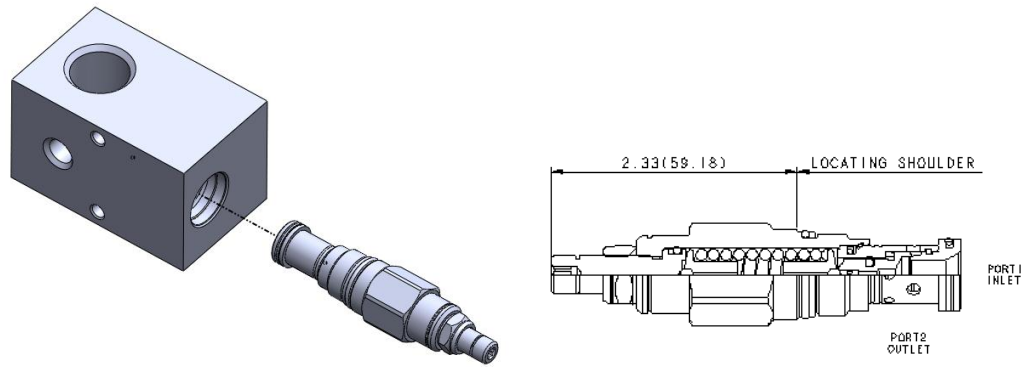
Sun Hydraulic RDDA pressure relief valve and FED manifold.
